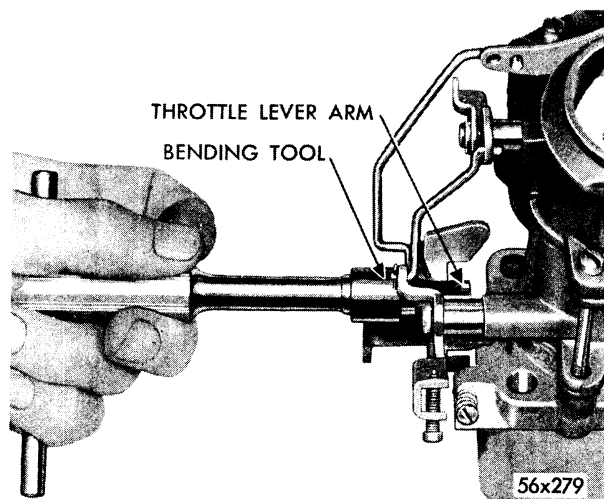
Bending Throttle Lever Arm for Unloader Adjustment
